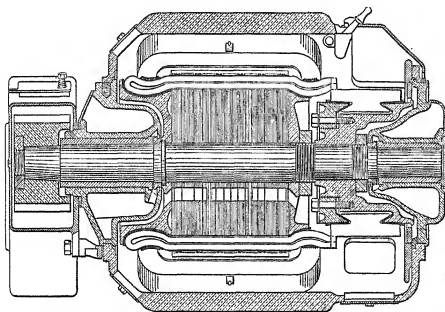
Arrangement of bearings in a large direct current geared railway motor.
